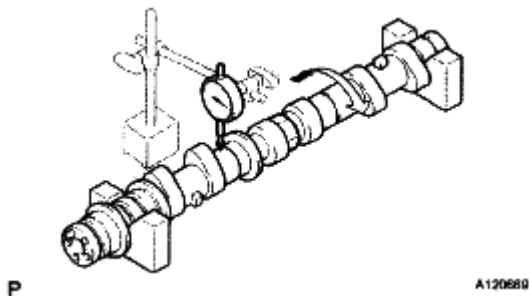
Measuring Circle Runout At Center Journal Using Dial Indicator
